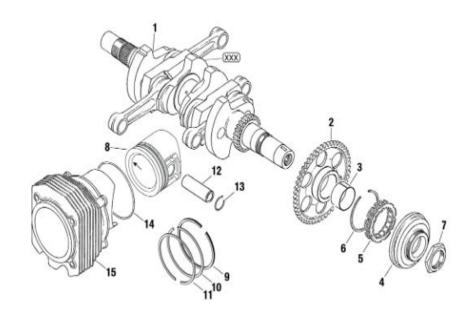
Engine crankshaft, piston, cylinder and spag clutch components. (Source: Rotax 914 Illustrated Parts Catalogue, Chapter 72-20-00)
